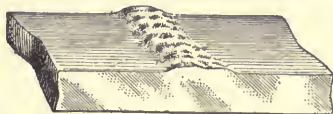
Weld normally charged, especially for hammering.
